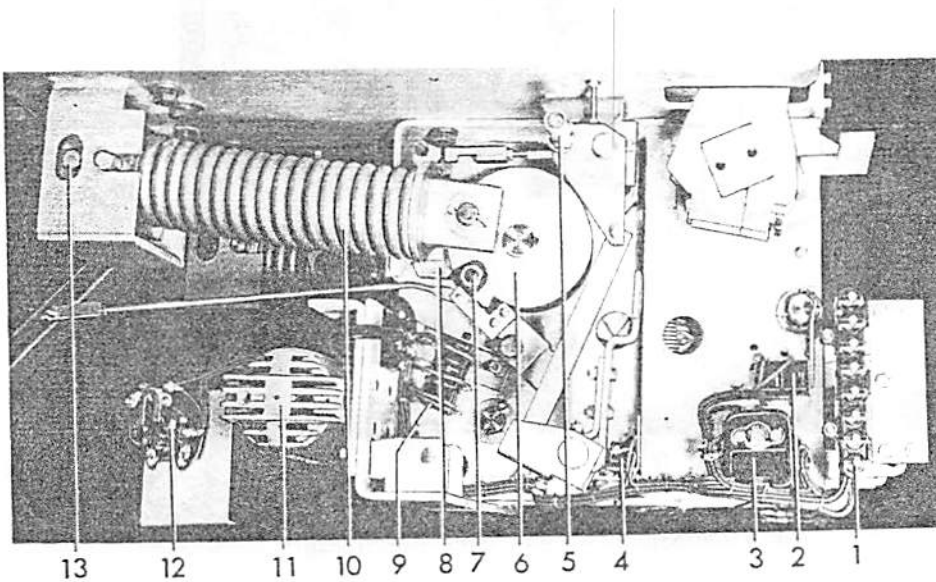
(8037375) Right Side View ML-13A Operating Mechanism
